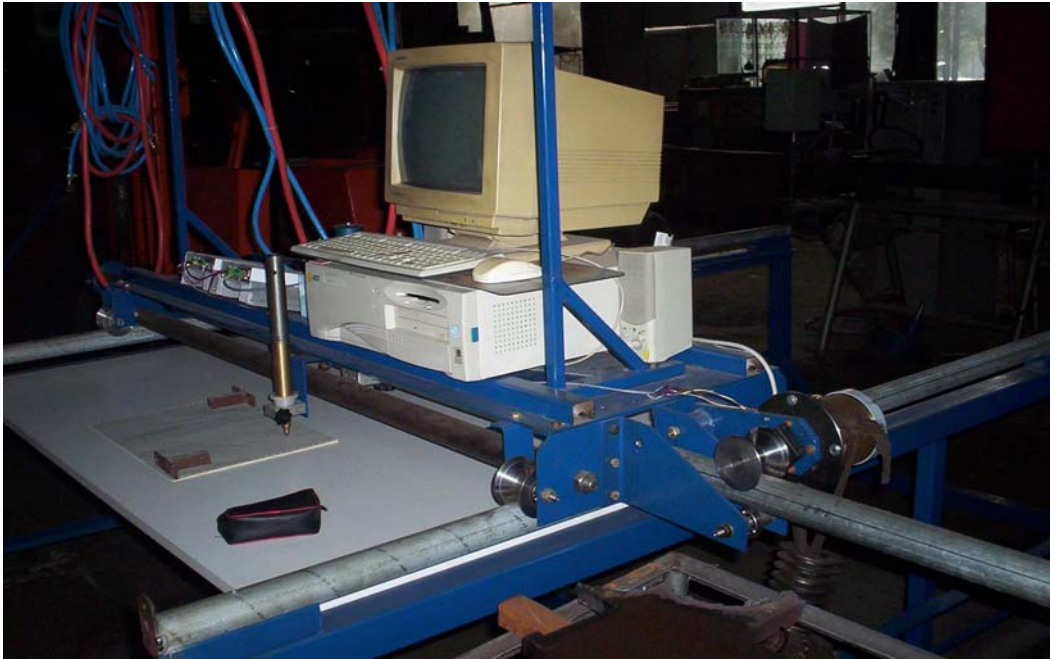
Left view of the CNC machine system for the mechanised oxygas cutting
